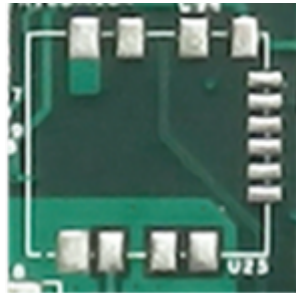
RTL8723 WiFi/BT Module PCB Footprint
